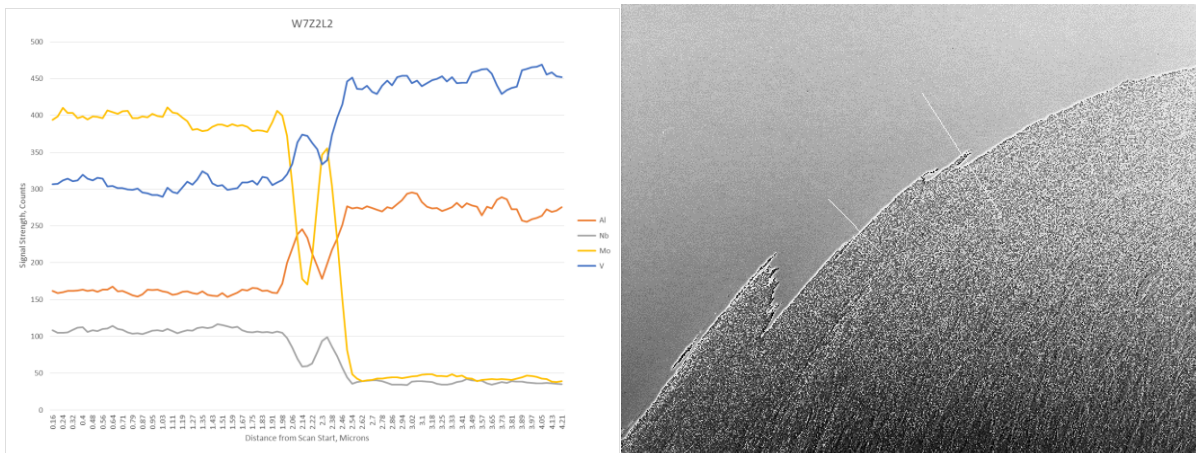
Weld 7, Zone 2, Line 2 (top).
